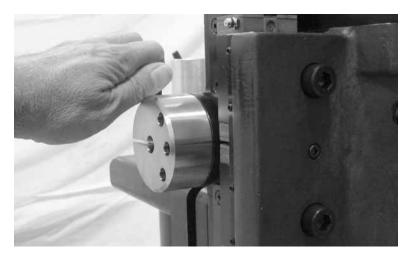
Loosen the feed lock lever enough to raise the spindle assembly with the feed handle. Tighten the lock when installing the tooling.
